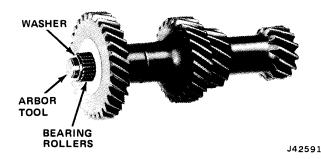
Countershaft Gear Arbor Tool Installed
